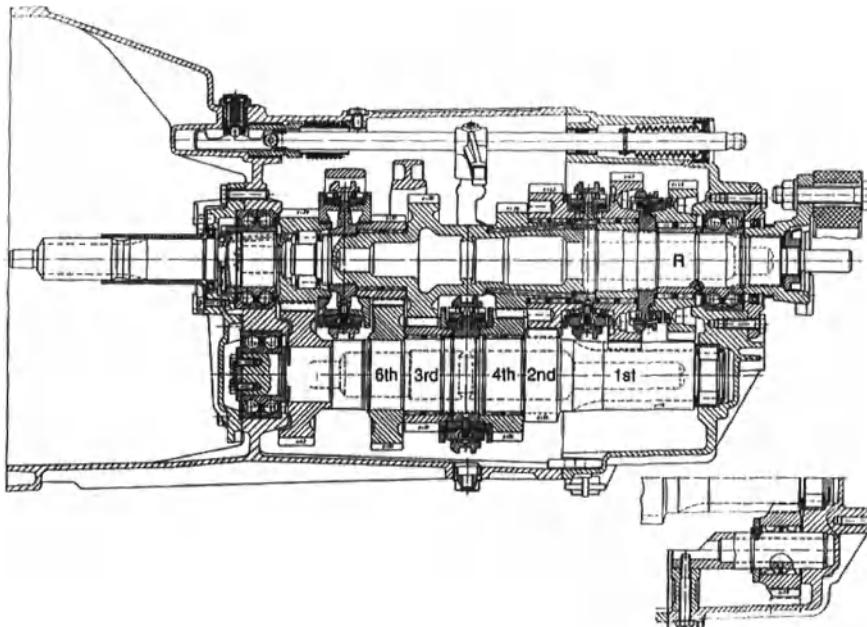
Double stage six speeds gearbox (courtesy of GETRAG)
